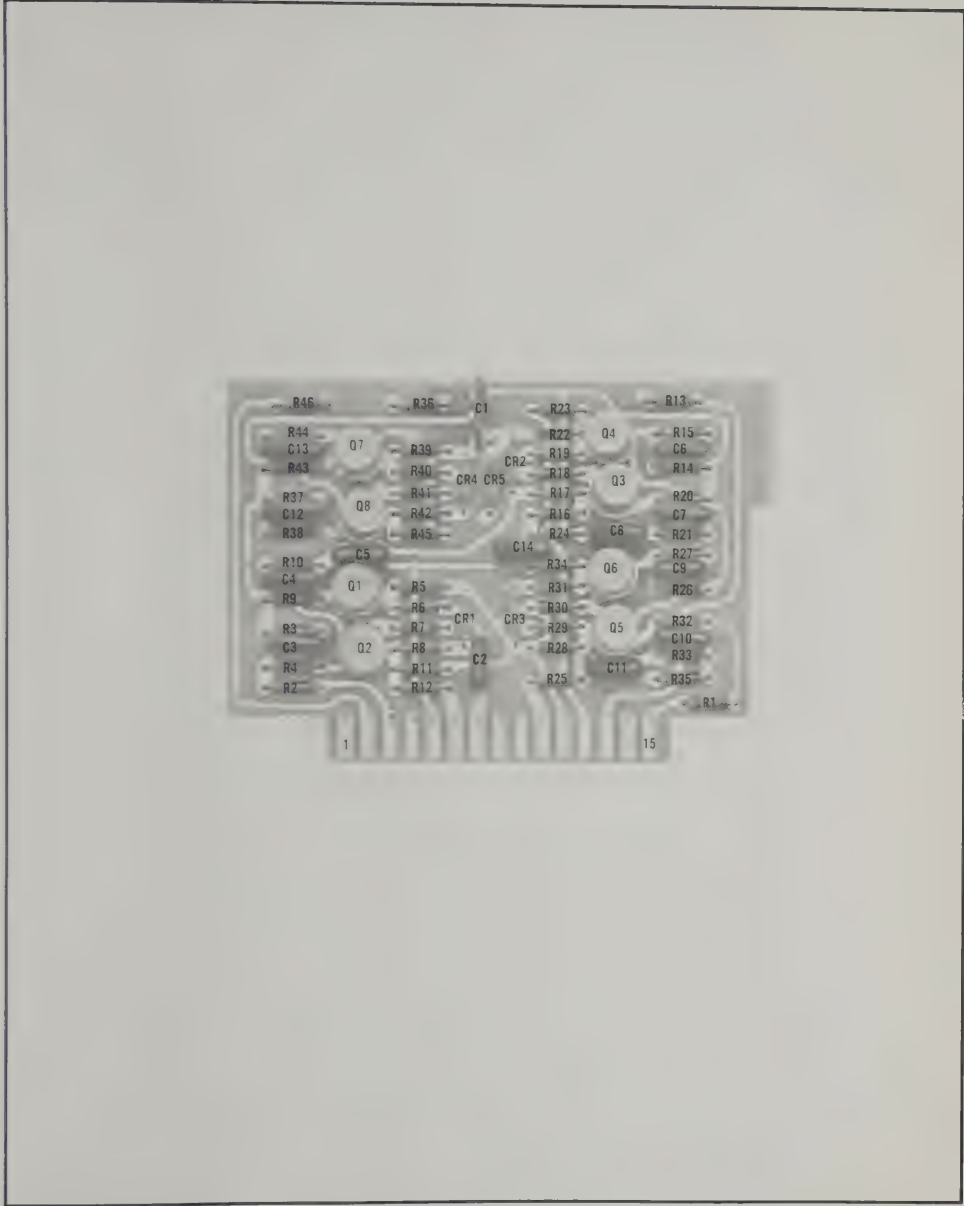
Decade Divider Assembly A29-A34, Component Location
